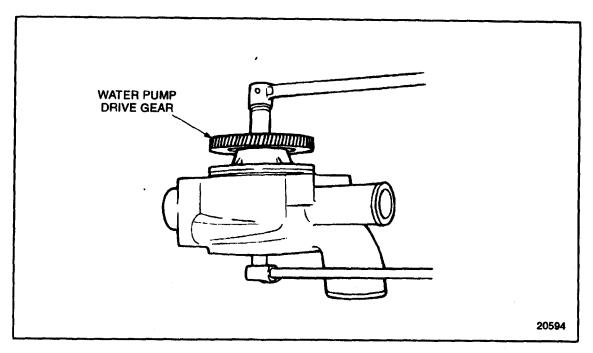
Water Pump Drive Gear Retaining Bolt Removal (GCM)
